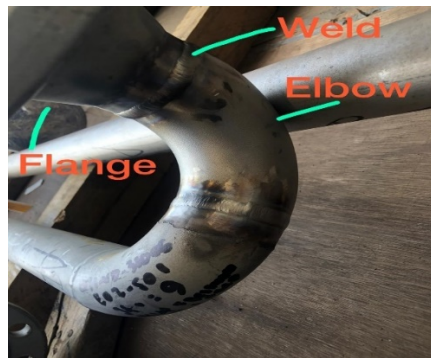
An SS2205 Sample Welded with ER2594
